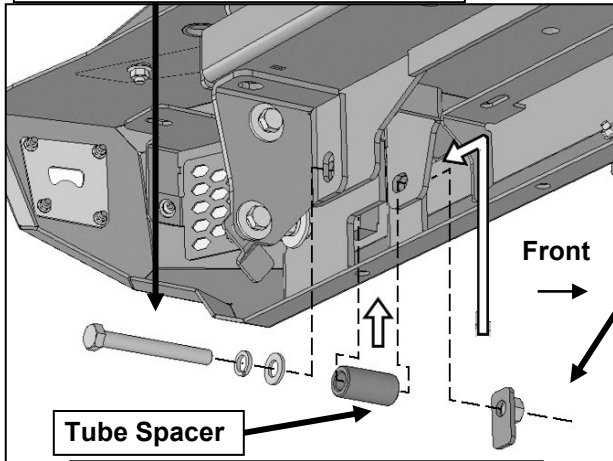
JK Models: Attach driver/left Support Bracket to tab on Winch Tray. Insert Tube Spacer between tab on Winch Tray and back of flange on Bumper.
